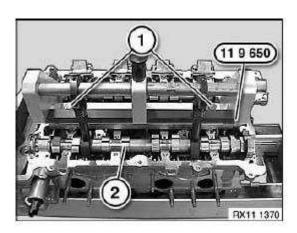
Identifying Special Tool (11 9 650) On Cylinder Head Courtesy of BMW OF NORTH AMERICA, INC.
